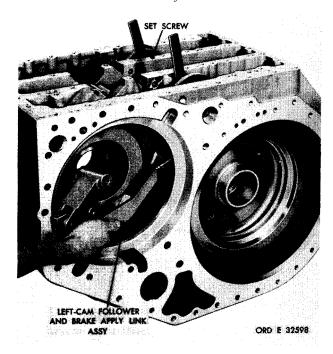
Removing (or installing) left-cam follower and brake apply link assembly
